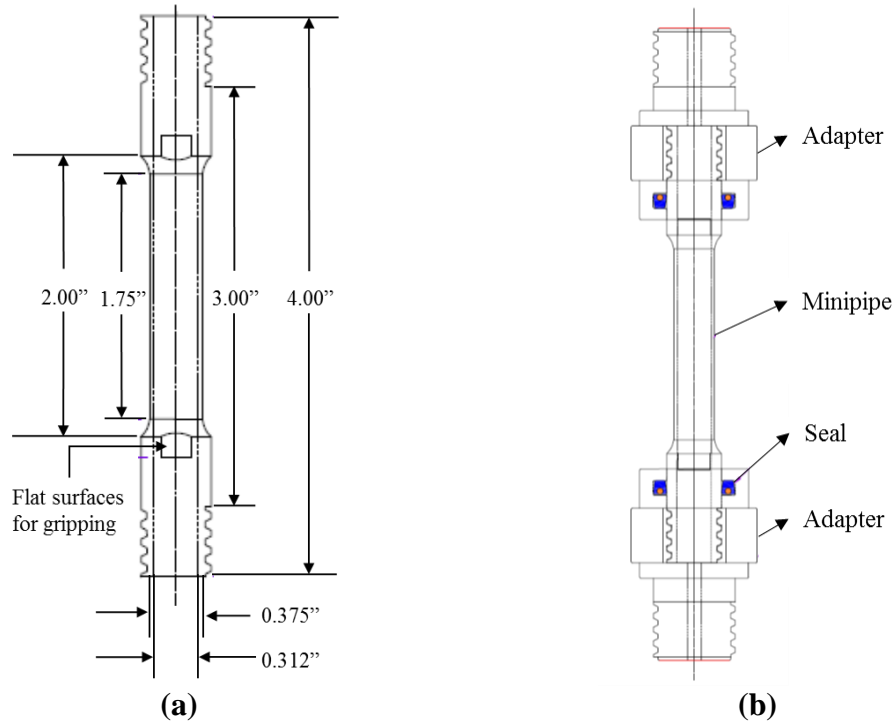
Test specimen: a) without adapters; and b) with adapters
